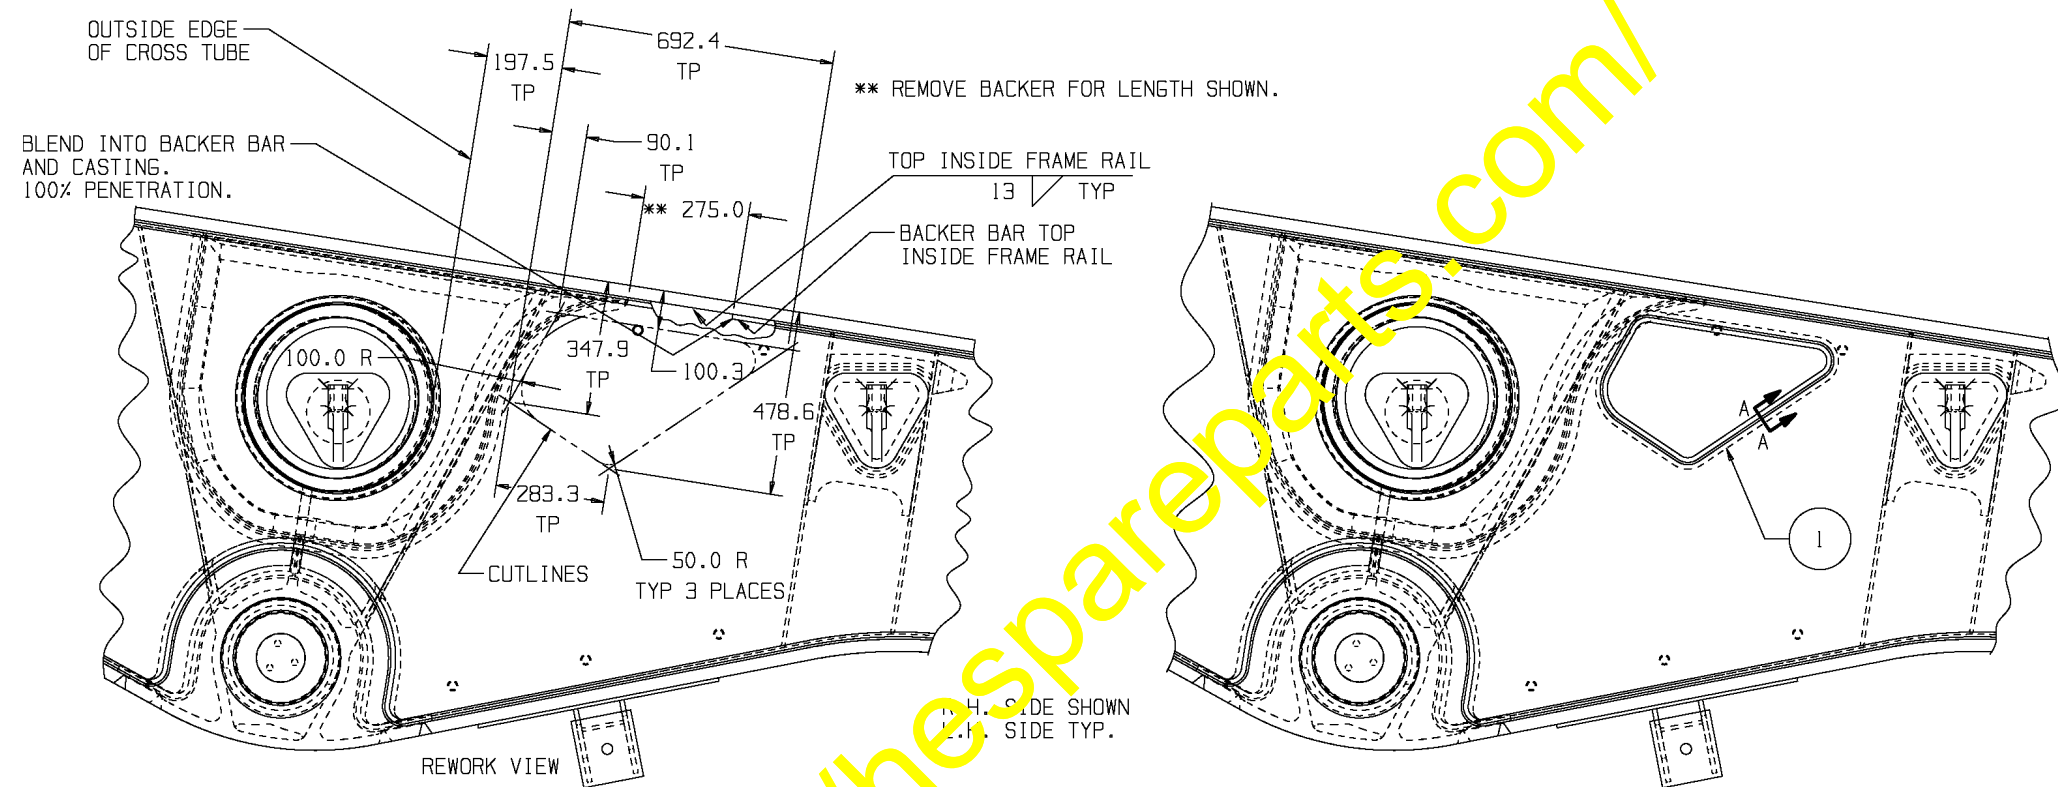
INSIDE VIEW OF THE FRAME RAIL
